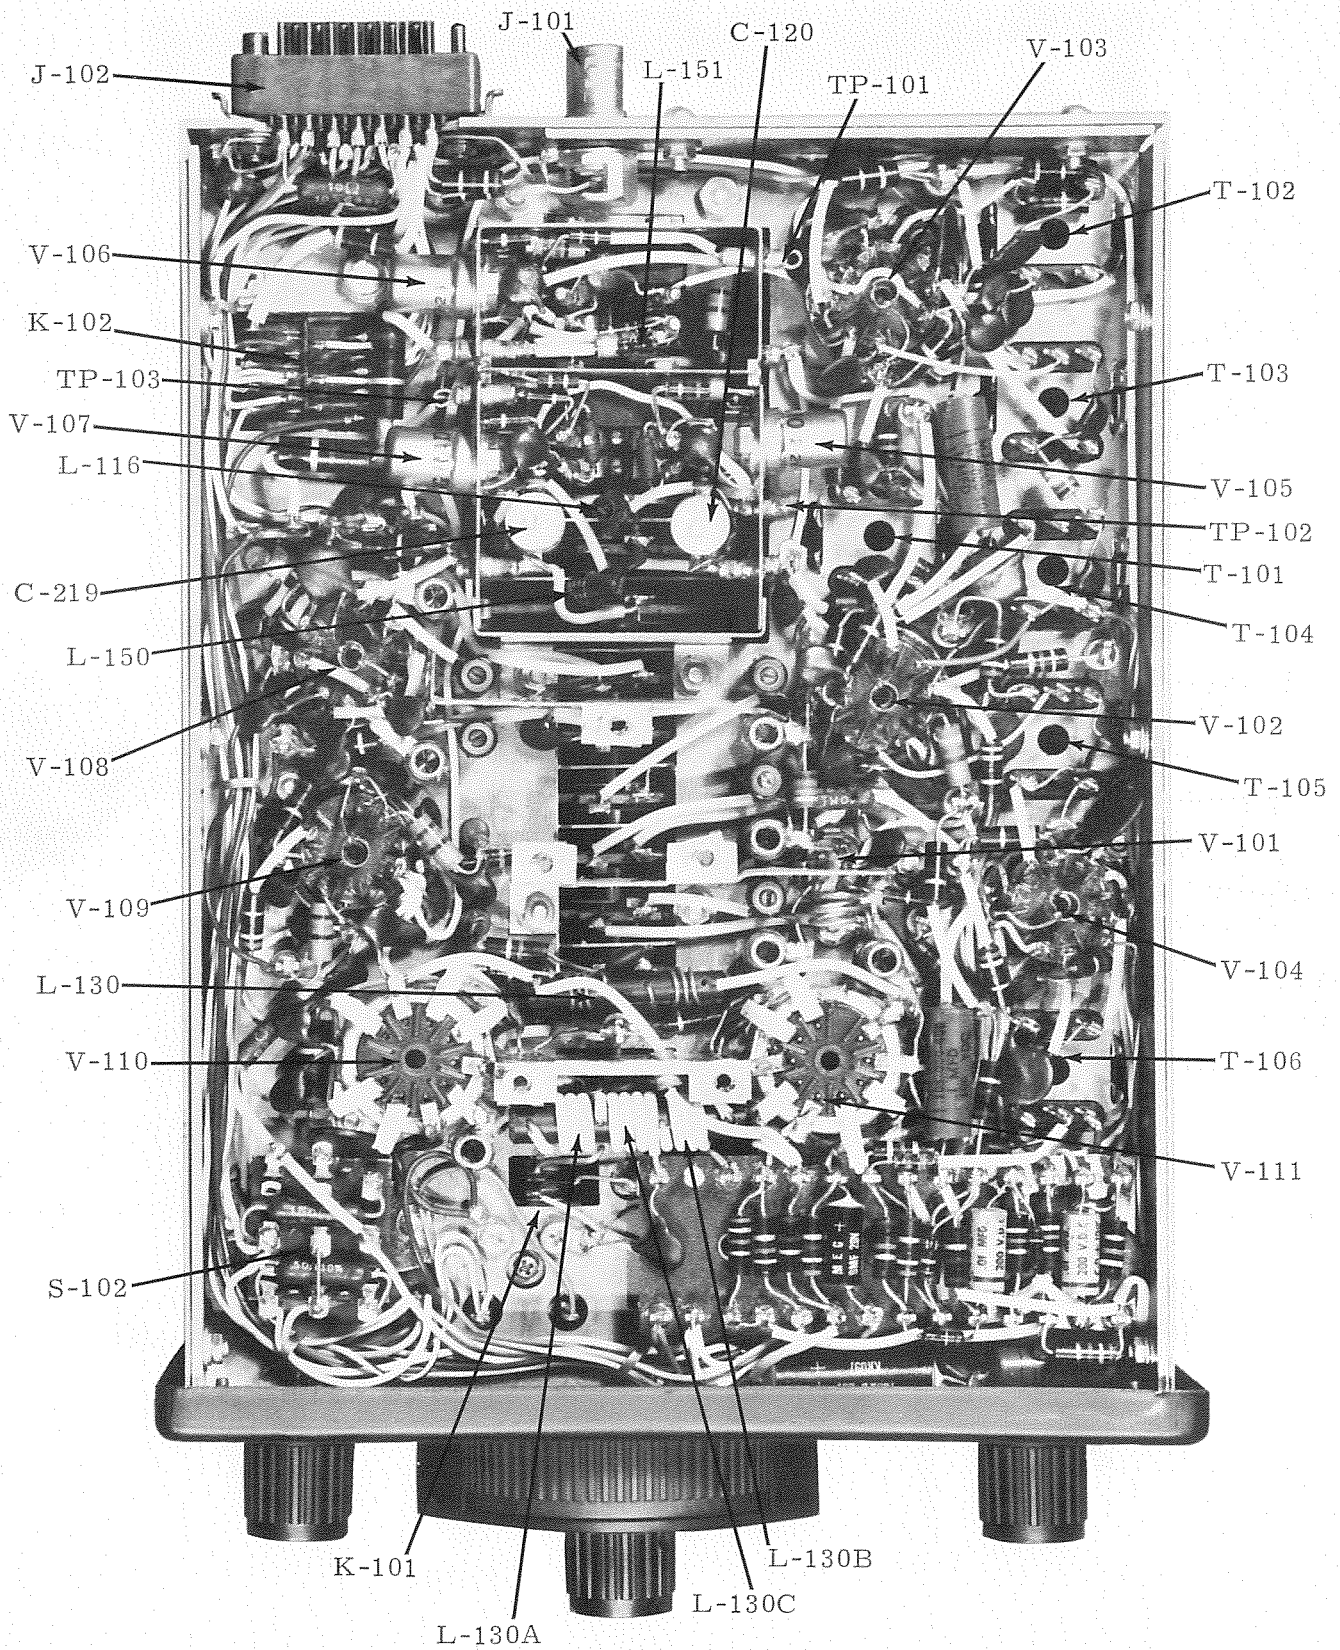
KY-95 CHASSIS BOTTOM VIEW
